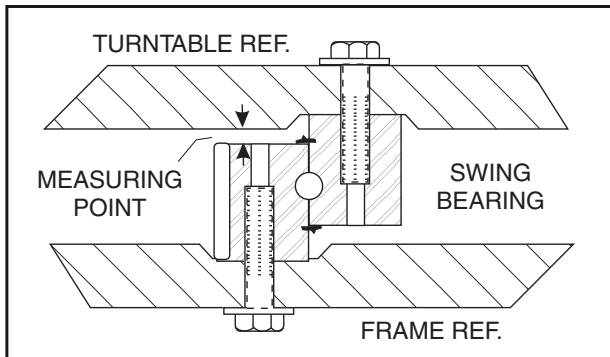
Swing Bearing Tolerance Measuring Point
